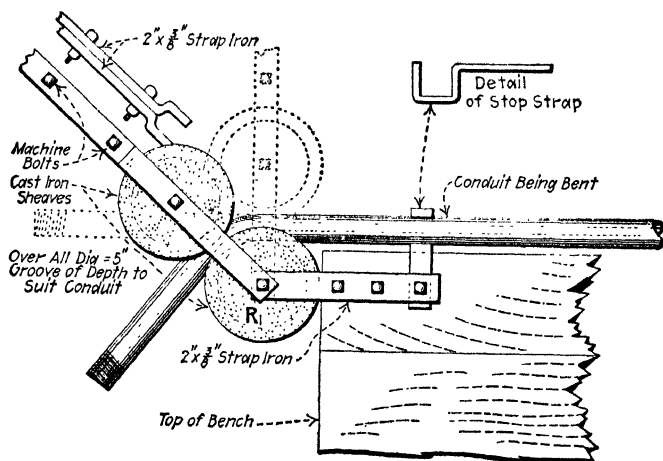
A grooved-sheave bender mounted on a bench top.
